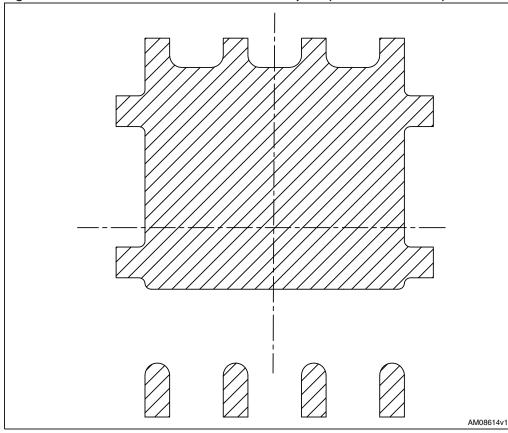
PowerFLAT™ 5x6 recommended footprint (dimensions in mm)
